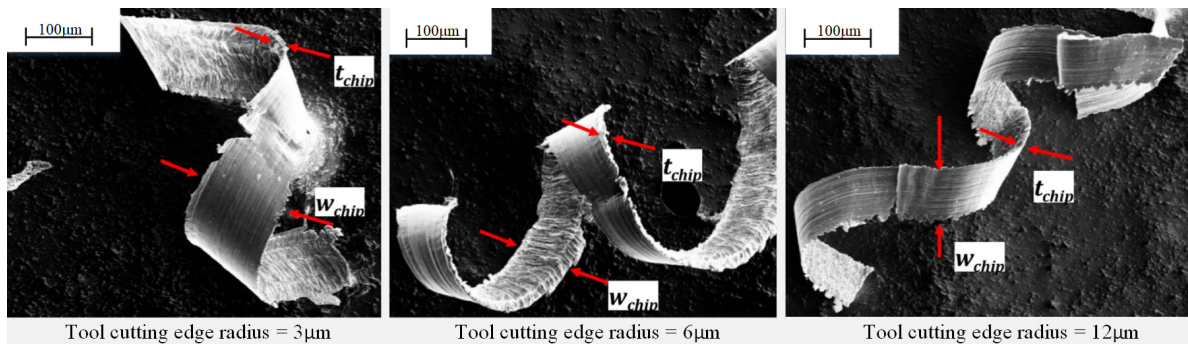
Effect of micro milling tool cutting edge radius on chip morphology.⁴¹
